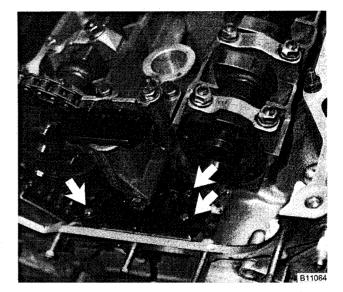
Timing chain guide mounting bolts (arrows). M50 engine shown.
